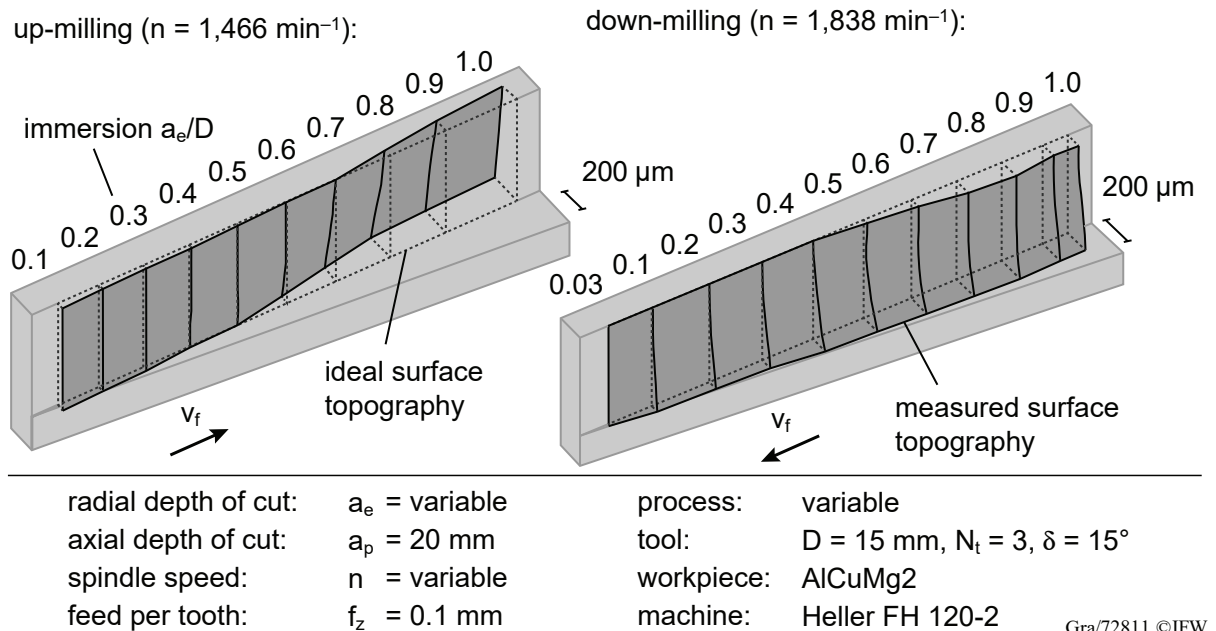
Influence of radial immersion a_e and tool rotation (up- and down-milling) on surface topography of the workpiece [Han83, p. 59 f.].
